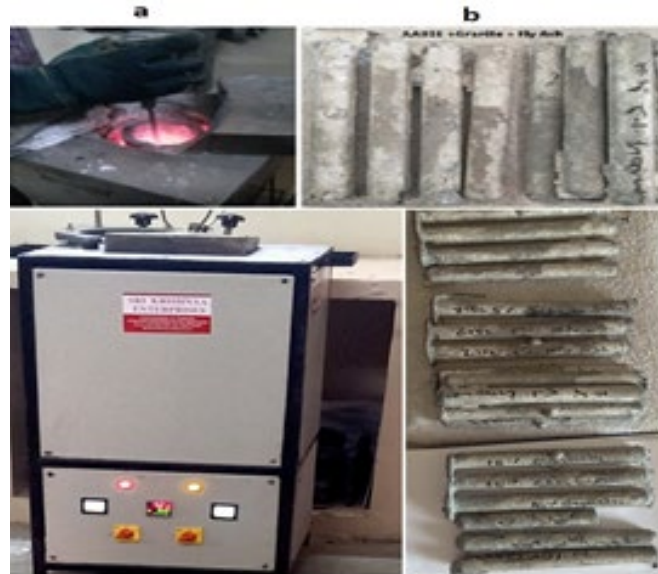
(a) Stir casting machine (vortex); (b) casted fingers
